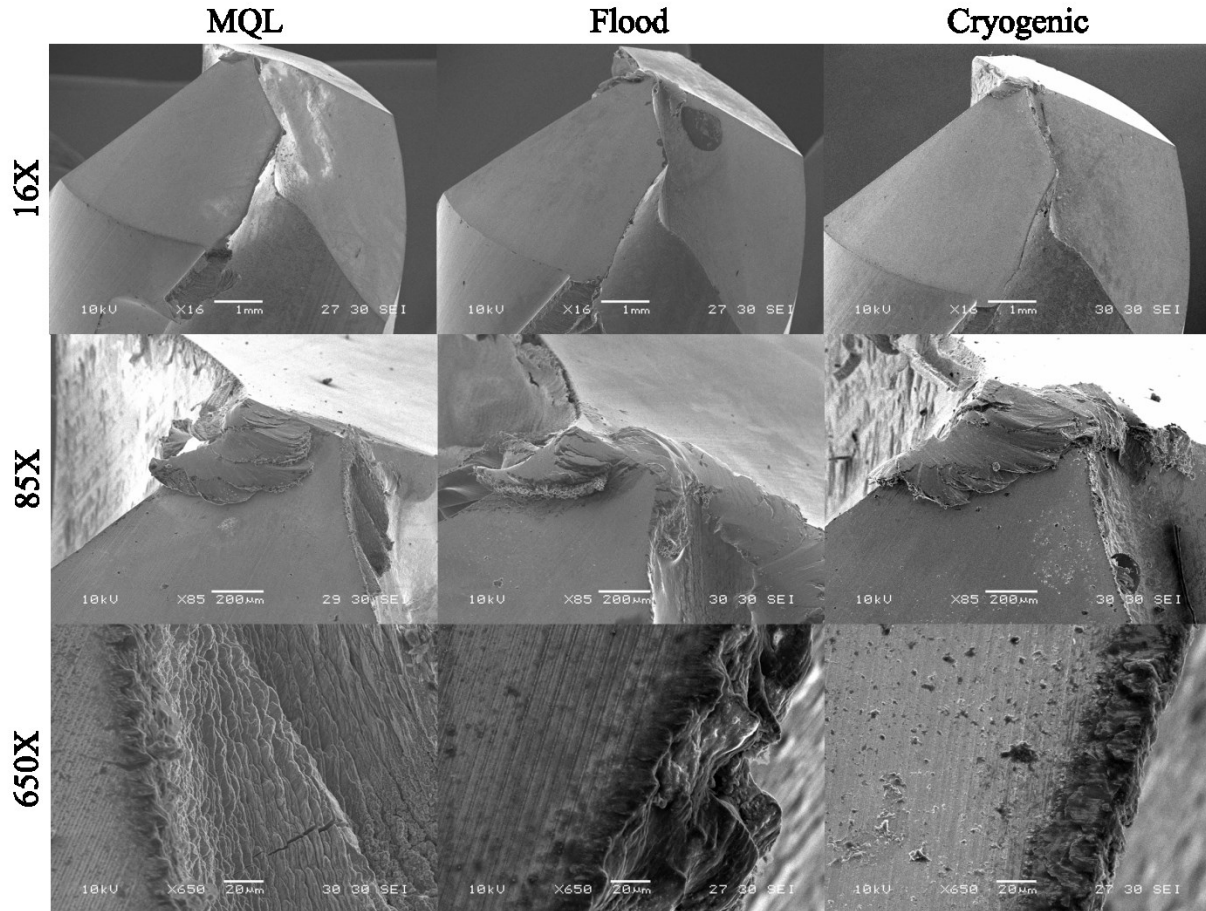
SEM micrographs of the tip of drill bits used for drilling experiments indicating adhesion of workpiece material onto the drilling tool
